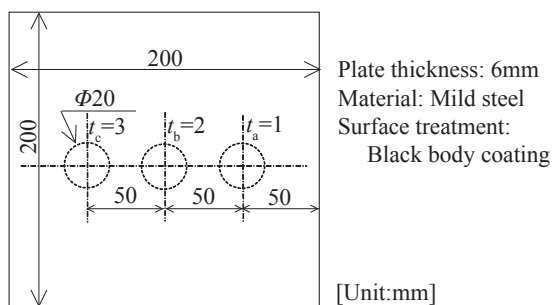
Dimension of specimen with flat-bottomed hole defects
